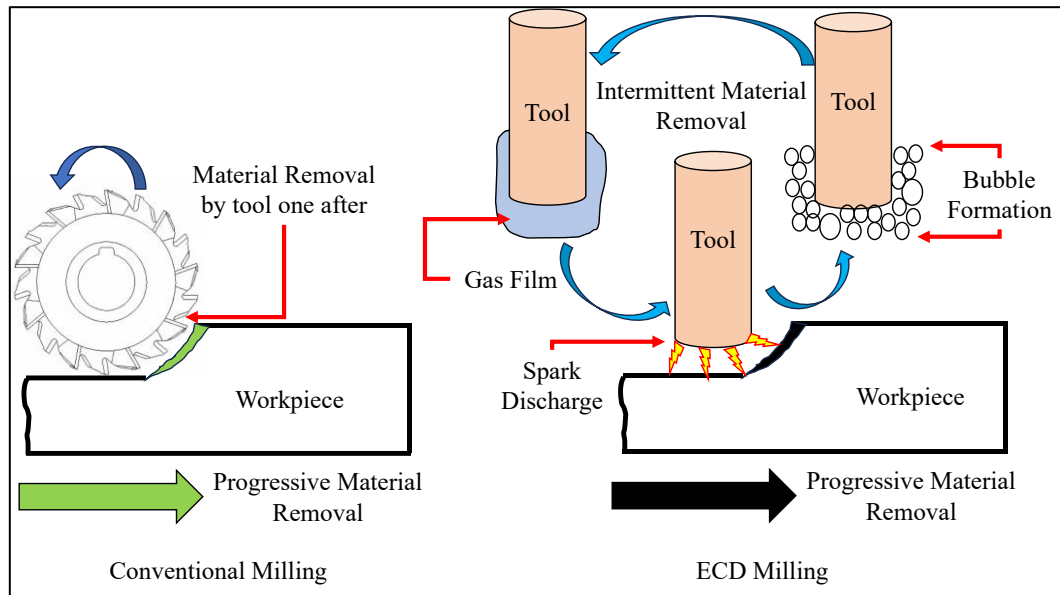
5 Schematic representation of conventional milling and ECD milling
